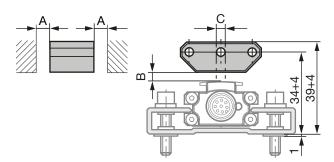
Dimensions and distances with BTL5-P-3800-2 magnet
